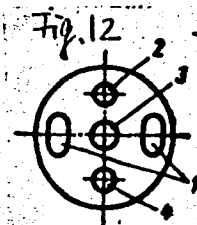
; Section of polychlorvinyl hose for semi-automatic welding in gas shield 1, 2, 3, 4 - apertures for the cable, the shielding gas, the welding wire and the control conductor, respectively.
